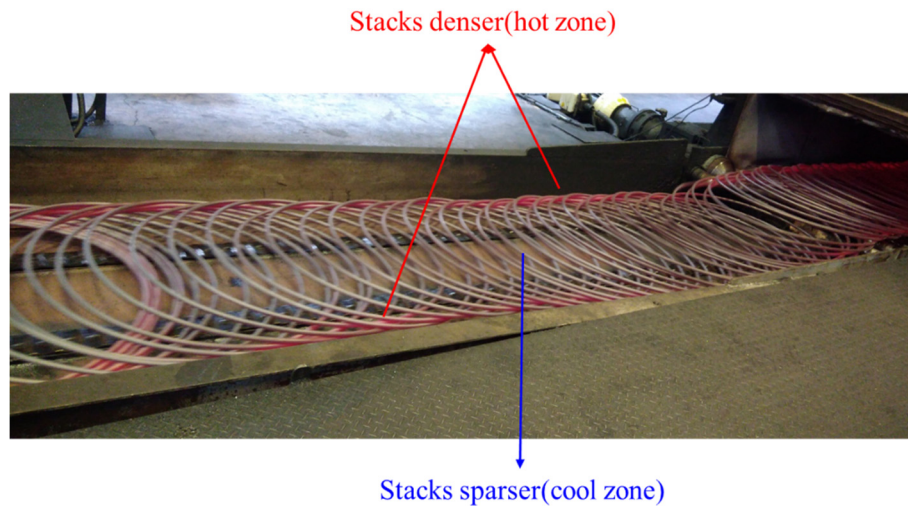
Hot and cool zone of coil rings on stelmor cooling conveyor
